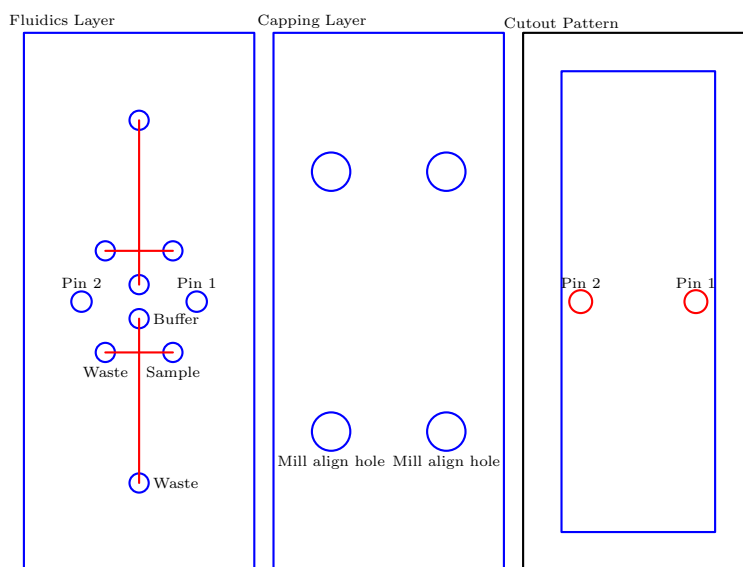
A sample CE chip (left) and its capping layer (centre) and the picture for cutting out the chip after processing on the CNC mill (right). This chip fits over the alignment pins and contains two CE separation devices for inject-separate experiments. The device is designed to have the capping layer solvent bonded to the channels, then milled flat using the mill align holes to align the mill z-axis as per the fabrication procedure outlined in Section 2.4.
